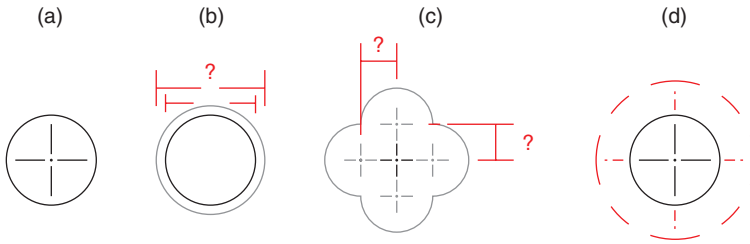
Example of fabrication tolerance and dimensional uncertainty.
